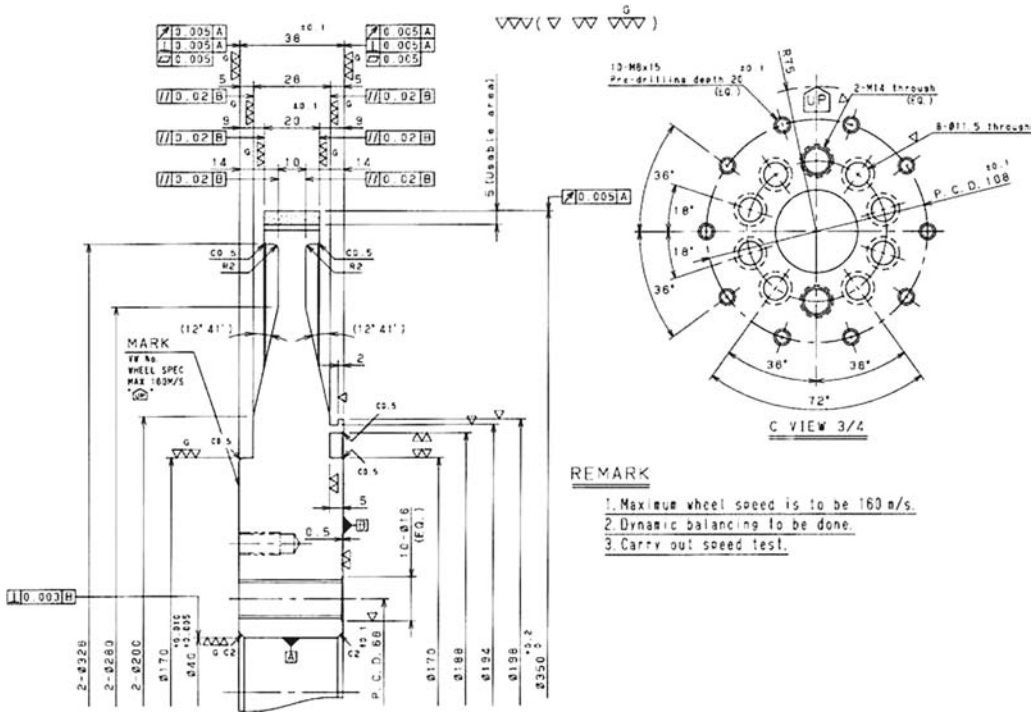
Steel-cored vitrified CBN wheel for grinding camshafts at 160 m/s.
